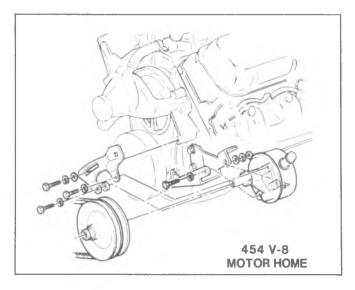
B-117--Power Steering Pump-454 V-8 Motor Home
